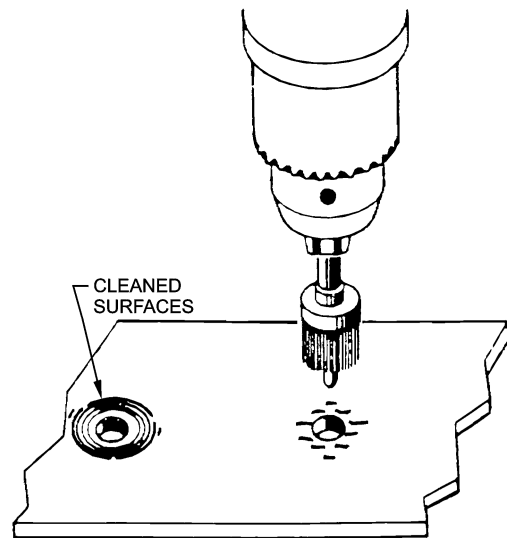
Stainless Steel Wire Brush With Pilot for Cleaning Aluminium Surfaces
